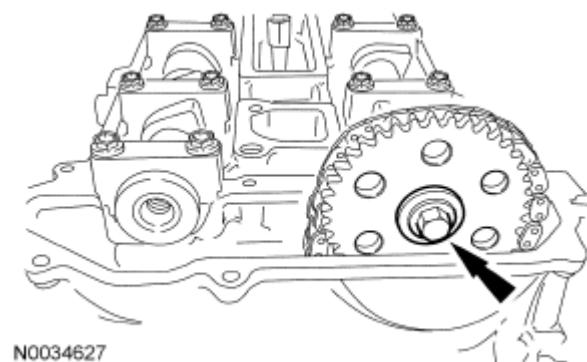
Identifying Intake Camshaft Drive Gear & Bolt
